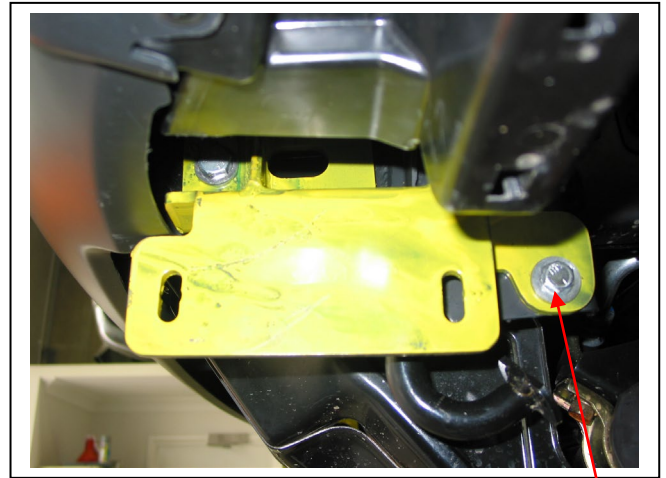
Passenger side shown 3/8 x 1 1/2 bolt, nut and washers
